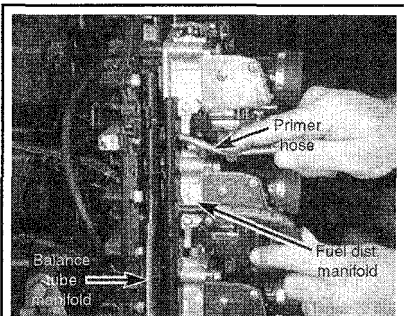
If the entire throttle body/carburetor assembly is being removed, disconnect all of the hoses
